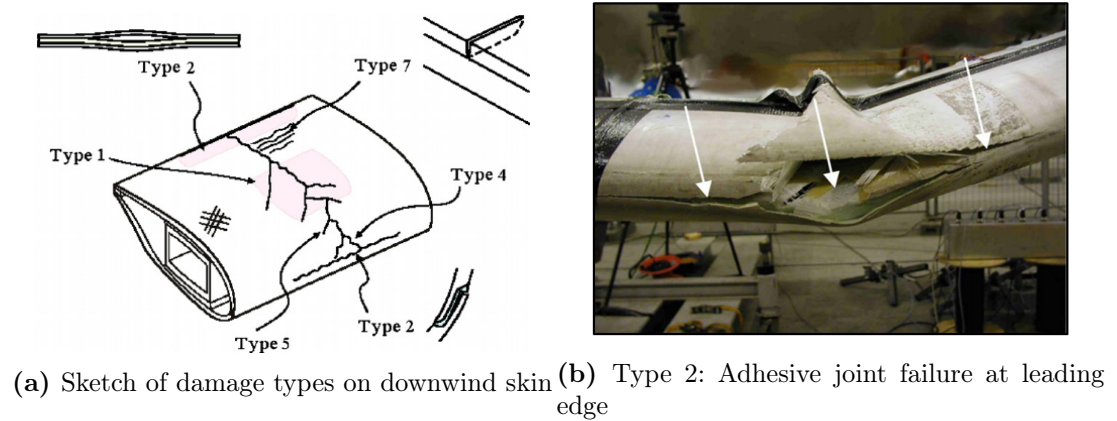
Examples of damage types identified on a blade structure tested to failure by a large compressive load [171]
